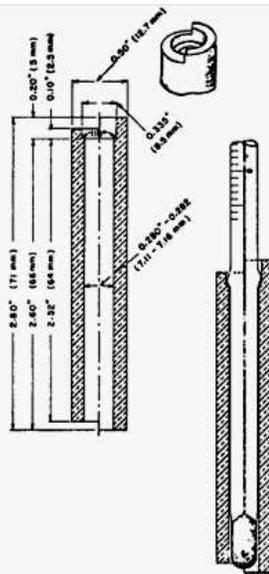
Test Gage for Checking Enlargements on Thermometers
